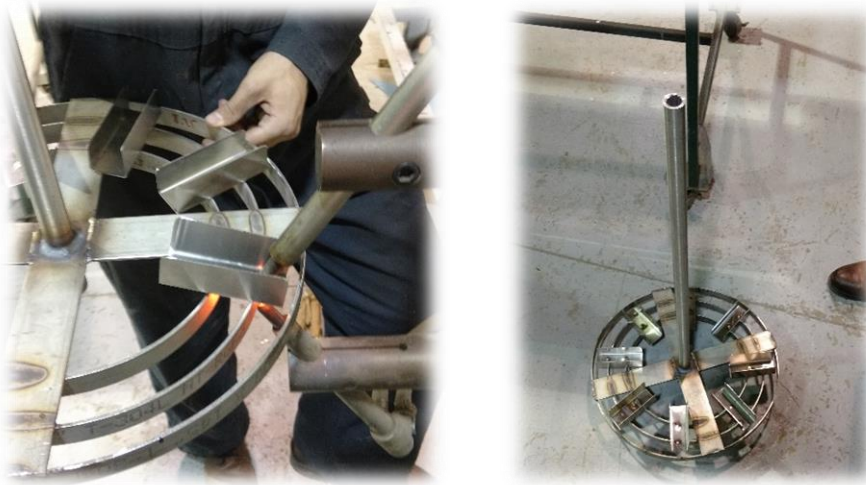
& 17b: Spot welding of brackets over bottom circles and overall view of the bottom half basket
